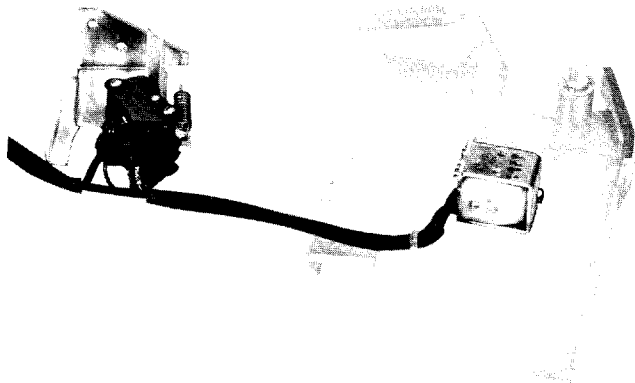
Shunt trip and cut-off switch. Coil is shown assembled to mounting plate.
